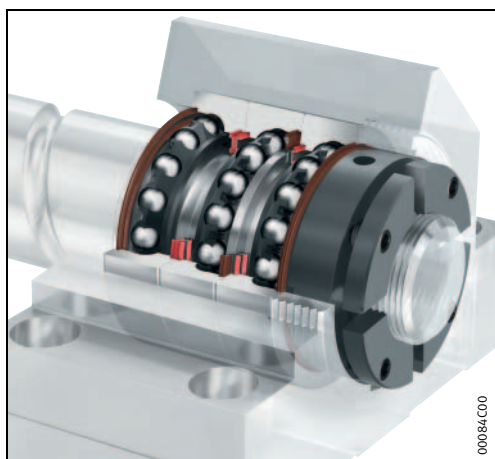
Screw drive bearing arrangement with one bearing set, comprising three sealed and greased universal bearings BSB..-2Z-SU, located by means of an INA precision locknut AM
